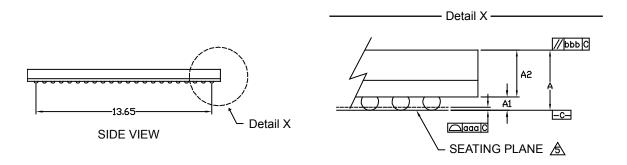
Side View of the A12A55 Package (left) with Detail X (right).
